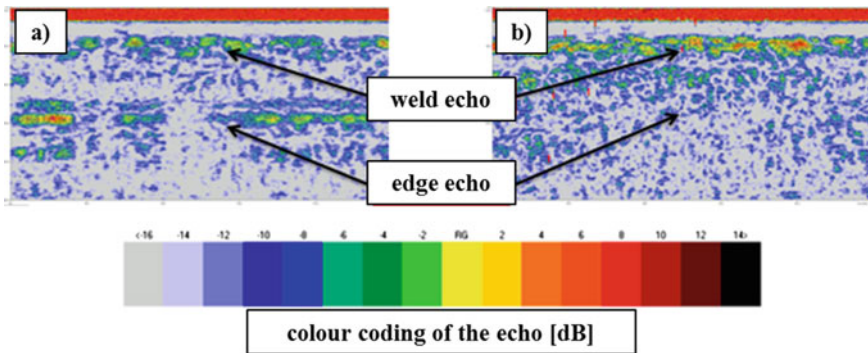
EMAT measurements at a flawless FSW-weld (a) and at a flawed weld (b) [2]
